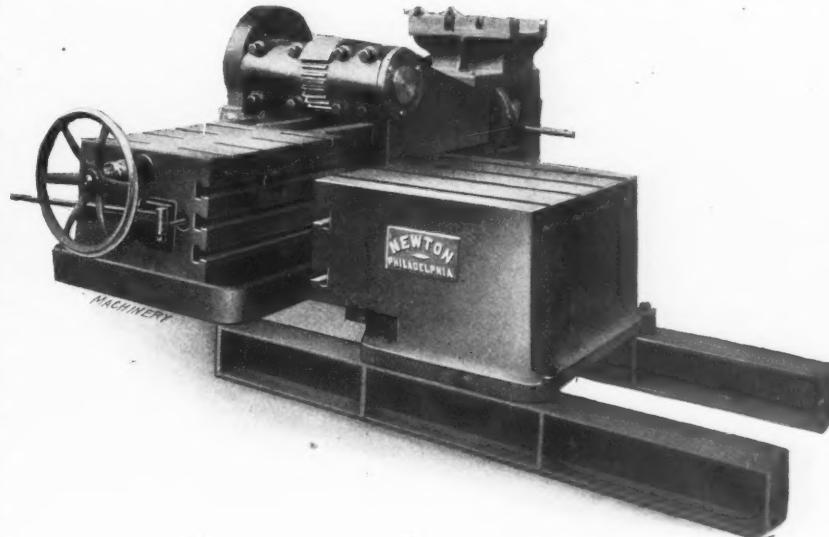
Side View of Newton Cold Saw showing Auxiliary Table carried on Parallels
